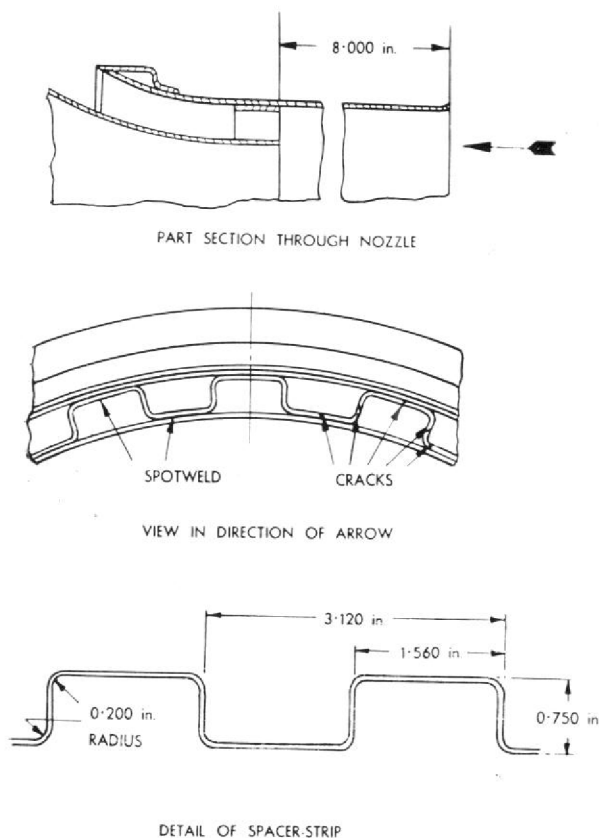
Location of cracks in spacer-strip; positions for spot-welding replacement sections, and dimensions for making replacement sections.
